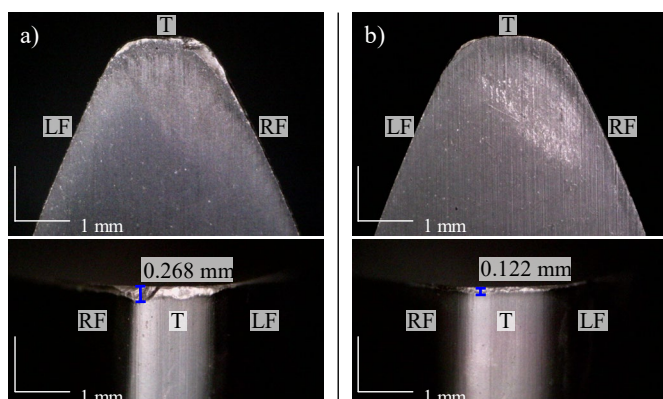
Wear on tool 1 after machining 30 workpieces: a) SOL; b) EOL.
